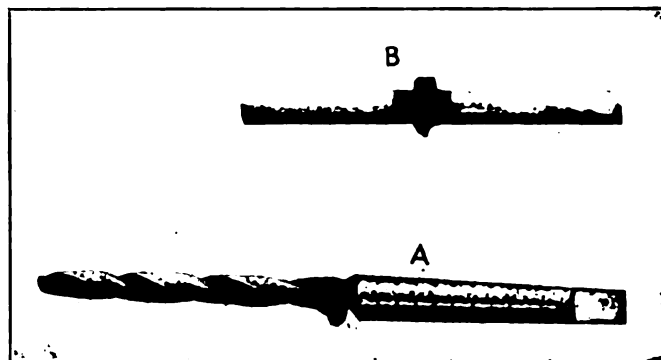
BUTT WELDED HIGH TO MILD STEEL
